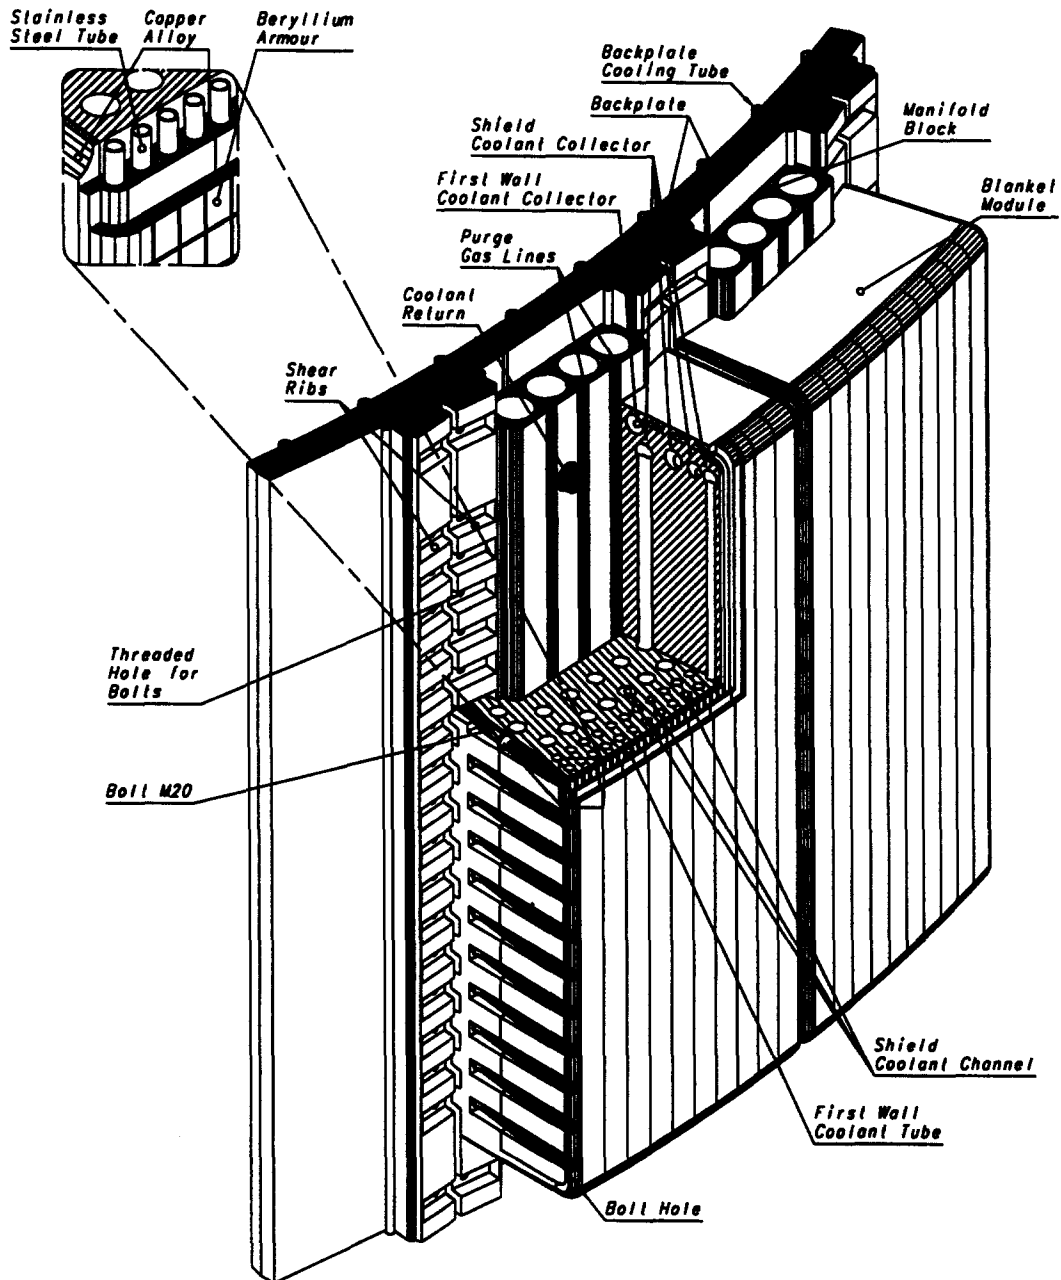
Cutaway view of the first-wall/shield module located at the inside mid-plane. A mechanical attachment to the backplate is shown. Other variants of the method of mechanical attachment, as well as a welded attachment, are under consideration.
